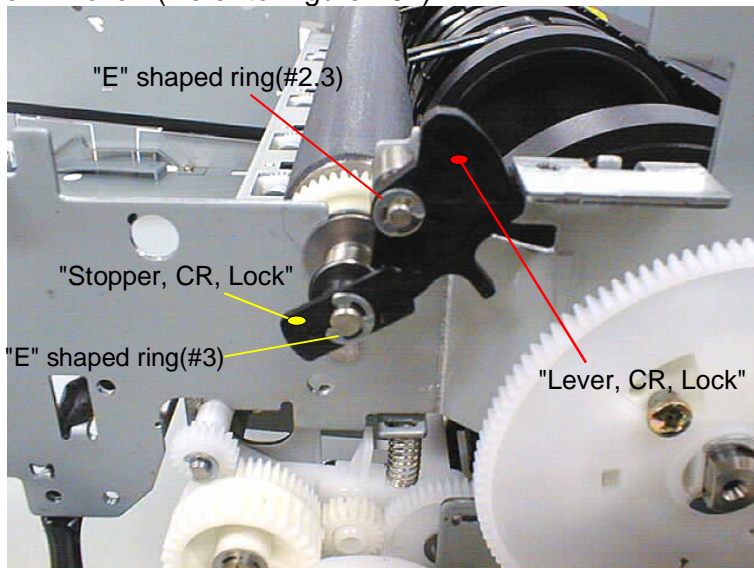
"Stopper, CR, Lock" and "Lever, CR, Lock" Removal
